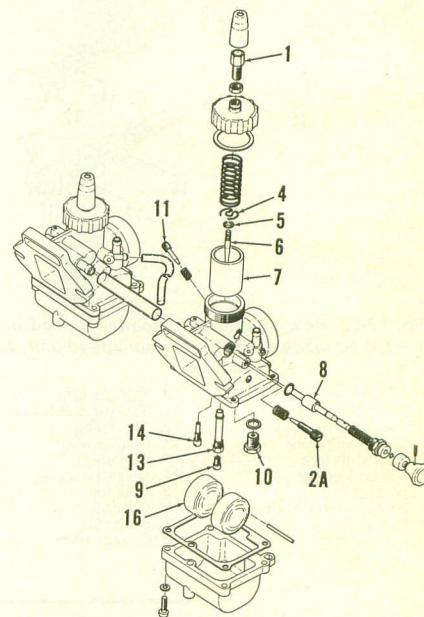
Exploded view of Mikuni carburetors used on model RD200A. Refer to Fig. Y4-1 for parts identification.
